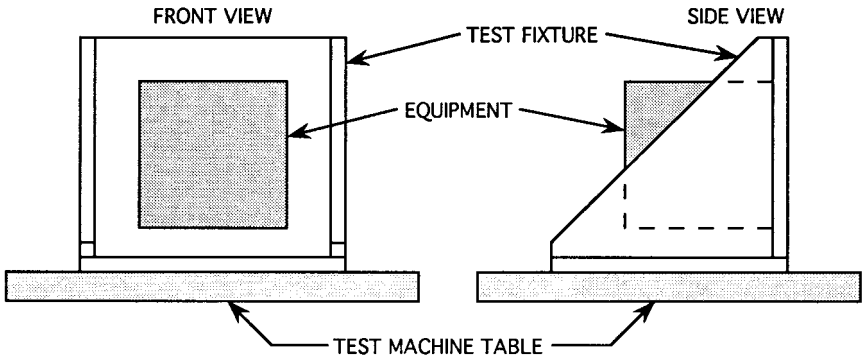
Test fixture to deliver excitation in the plane of the equipment mounting points.
